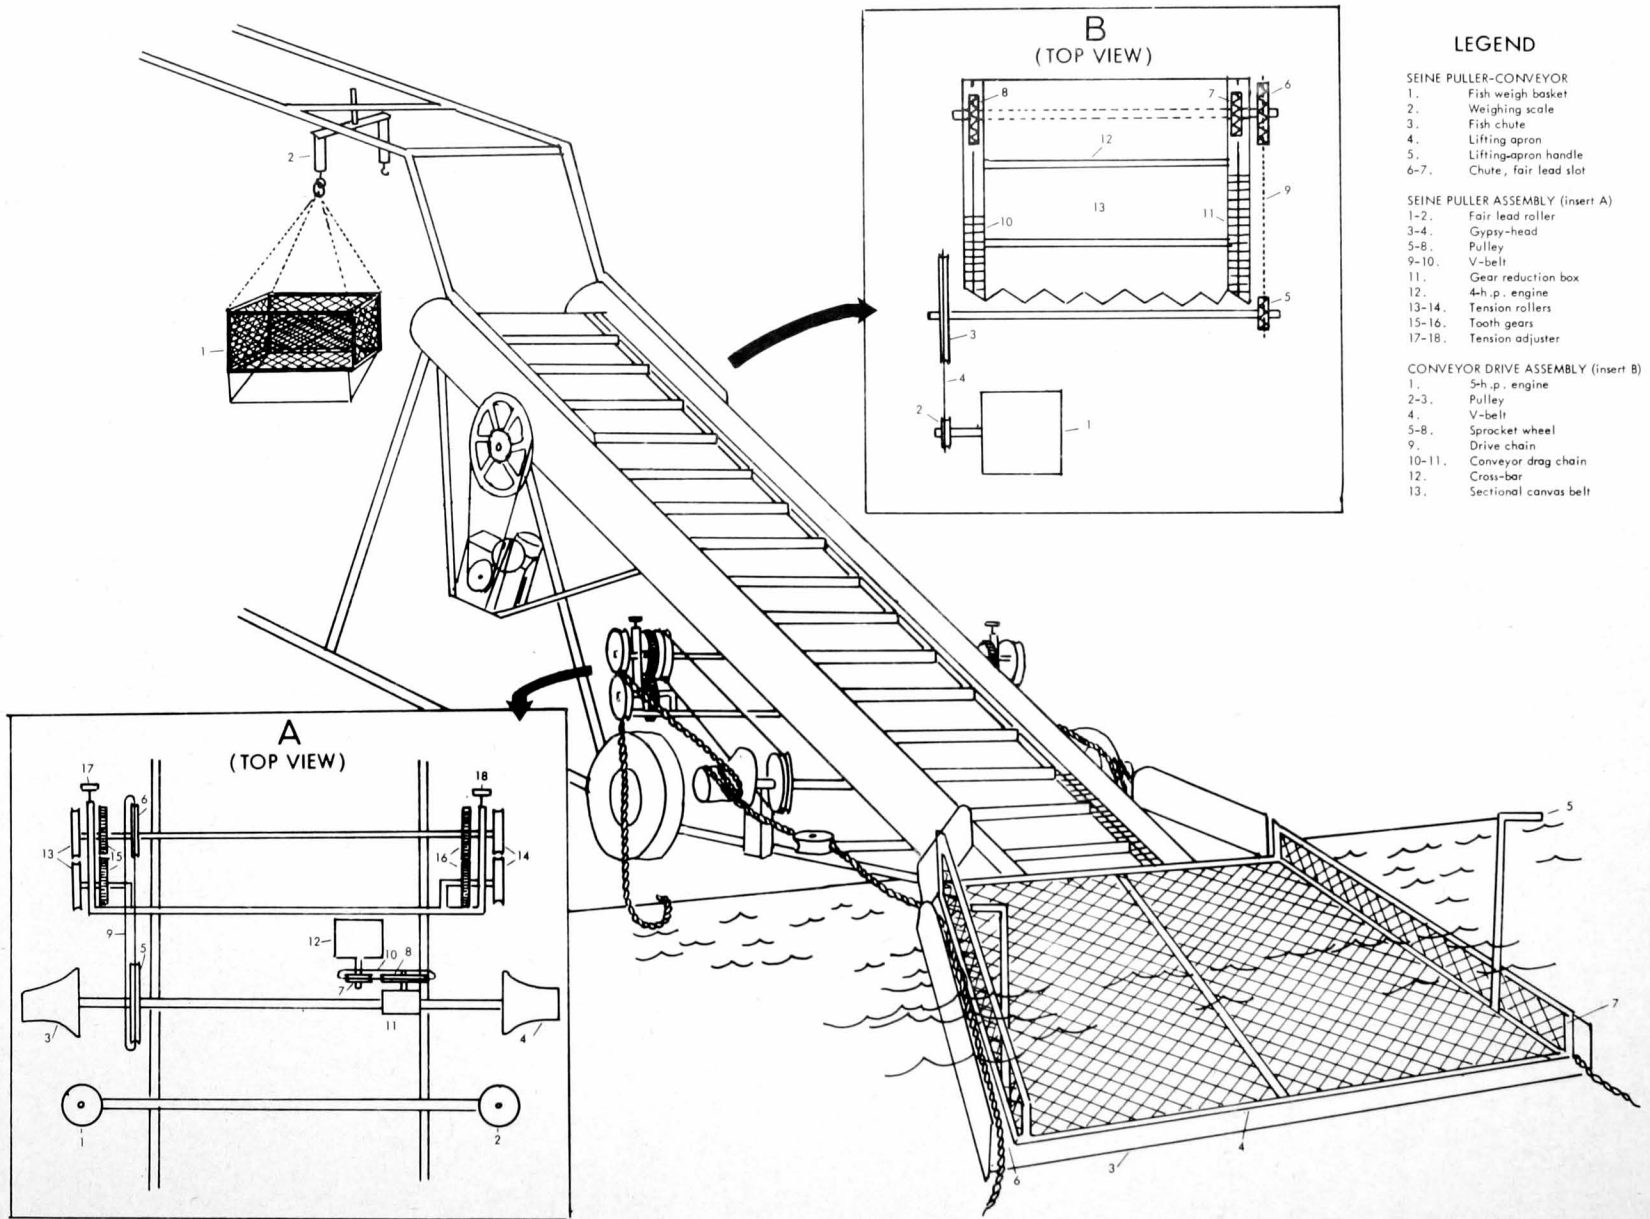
Schematic drawing of combination seine puller and fish conveyor showing the main components of the system and the method of attaching hauling lines.
